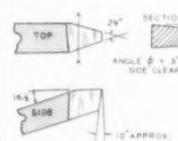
A (Left): Tool bit formed for cutting an external Acme thread.
